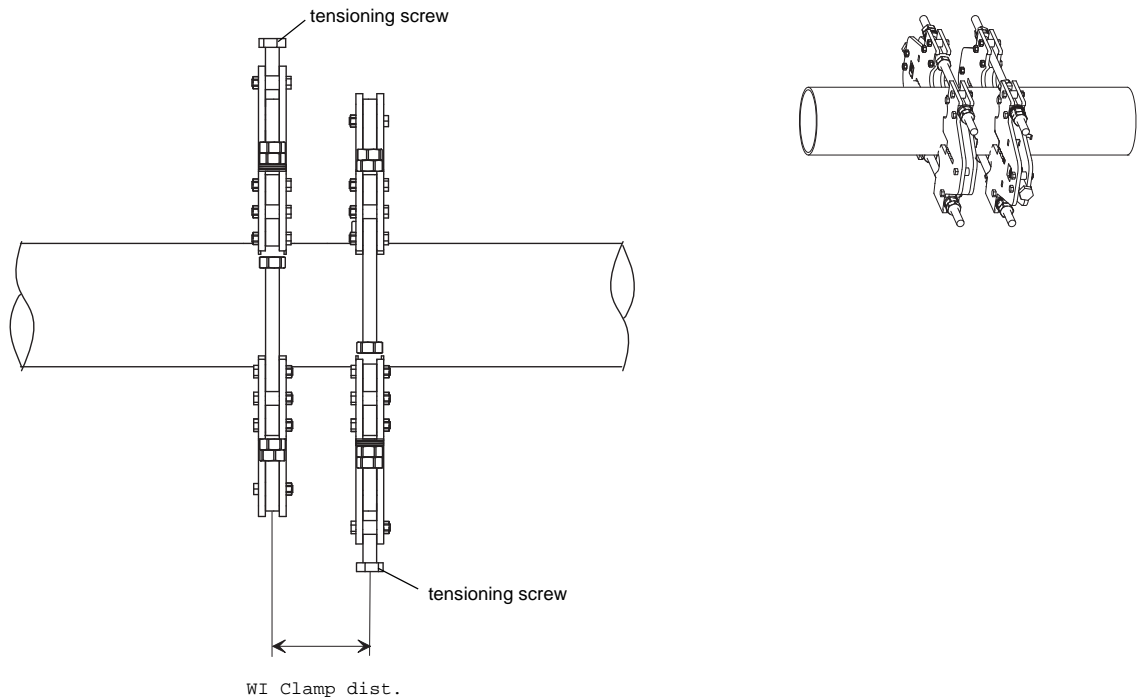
Installed pipe mounting fixture in diagonal arrangement (top view)
